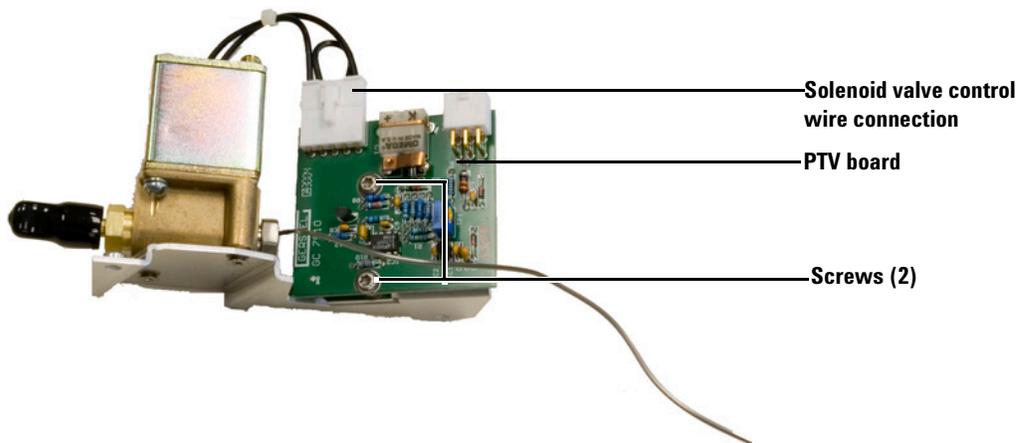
PTV CO₂ cryo and board assembly ready for installation
